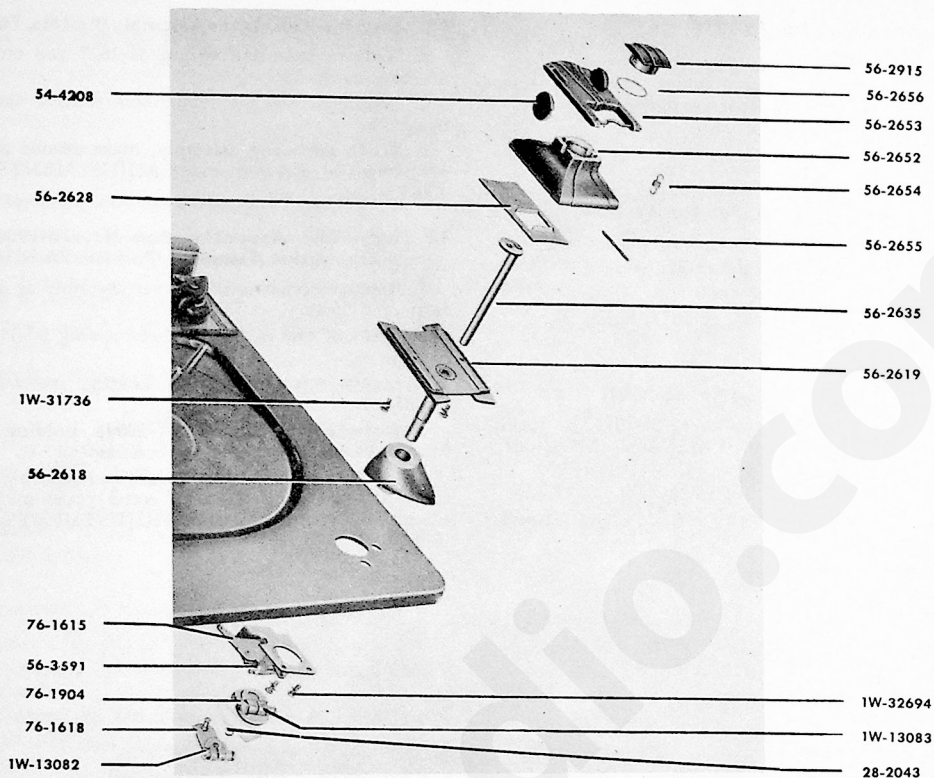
RECORD SHELF AND ASSOCIATED ASSEMBLIES, EXPLODED VIEW.
